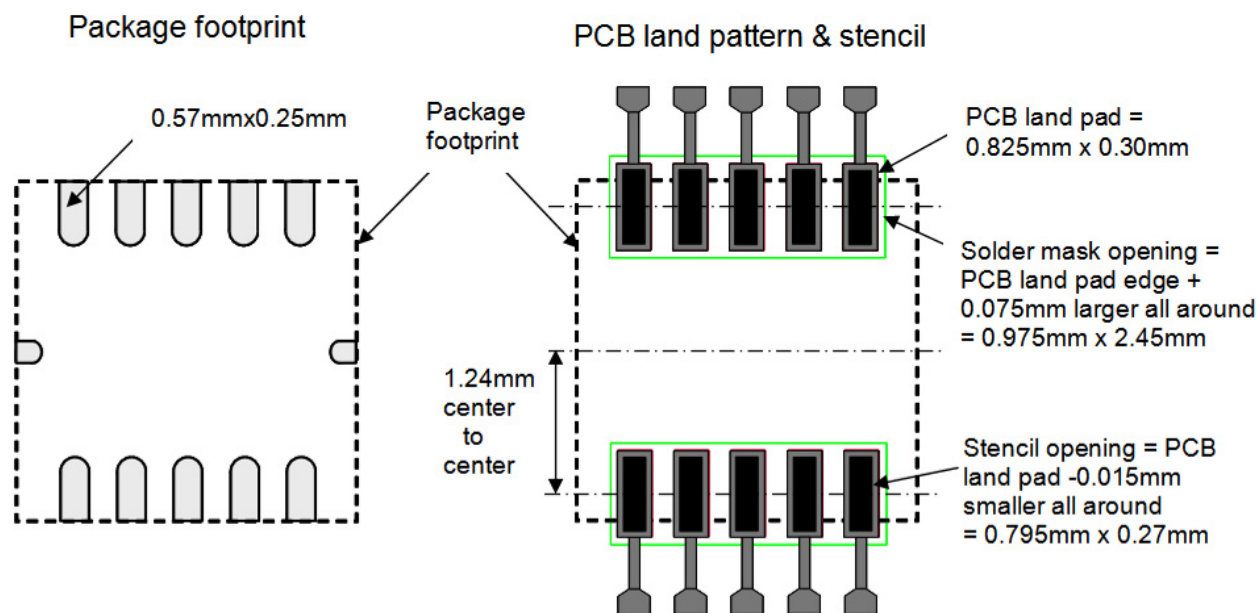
Package Footprint, PCB Land Pattern, and Stencil Design
